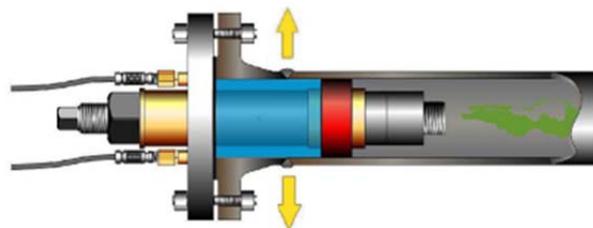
High Lift Flange Weld Test Plug in pipe
